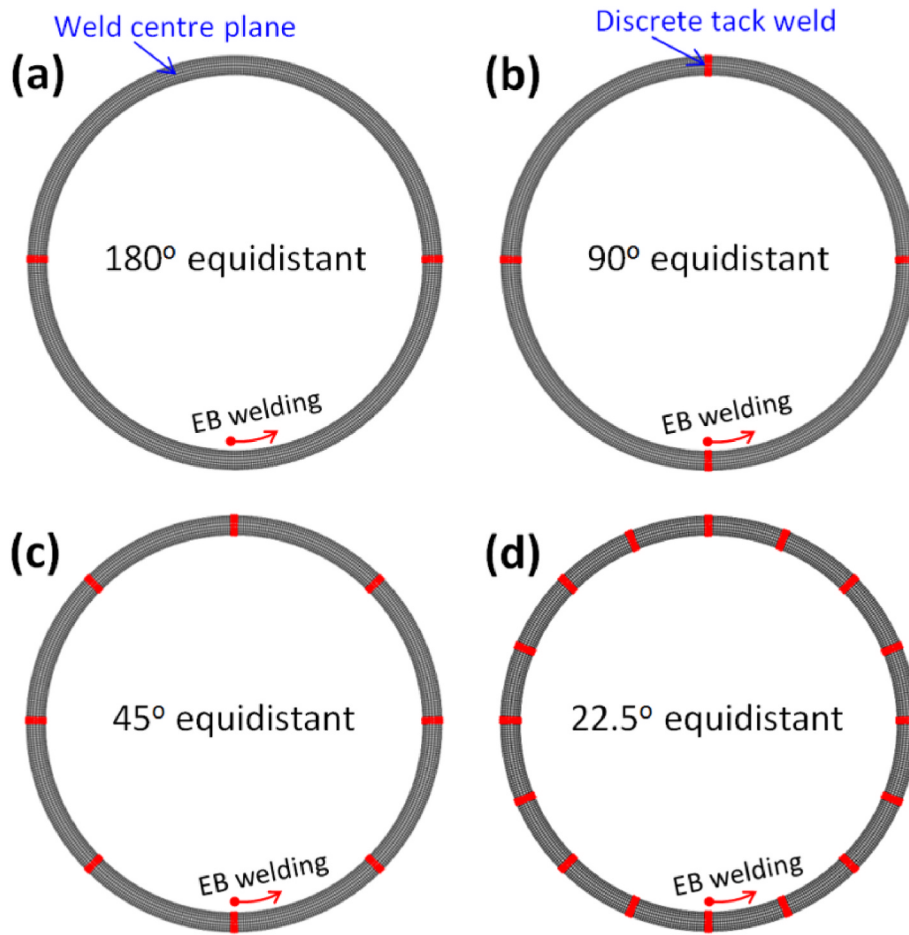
Design of circumferentially equidistant discrete tack welds at angular intervals of 180° (a), 90° (b), 45° (c) and 22.5° (d) on the EB weld plane. Each tack weld is 20 mm wide in the circumferential direction.
